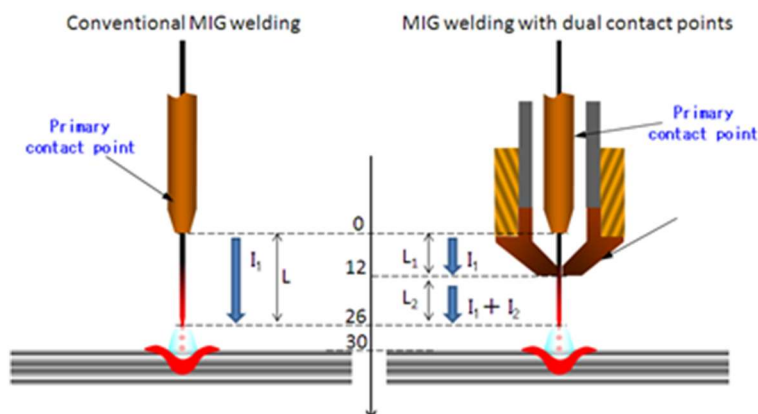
Schematic illustration of conventional MIG welding and DCF-MIG welding.
